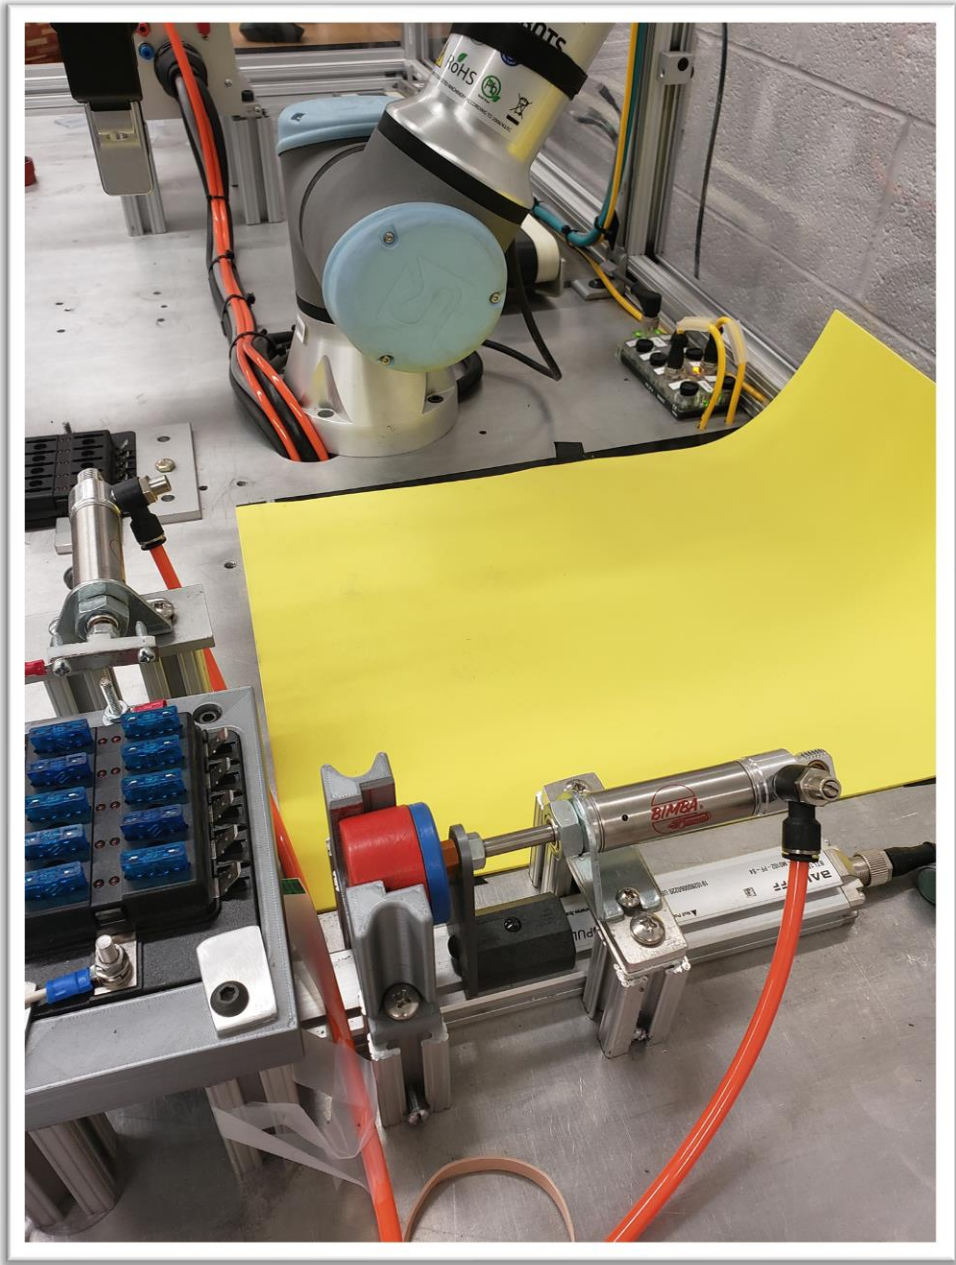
Pneumatic piston pressing assembly pin.
